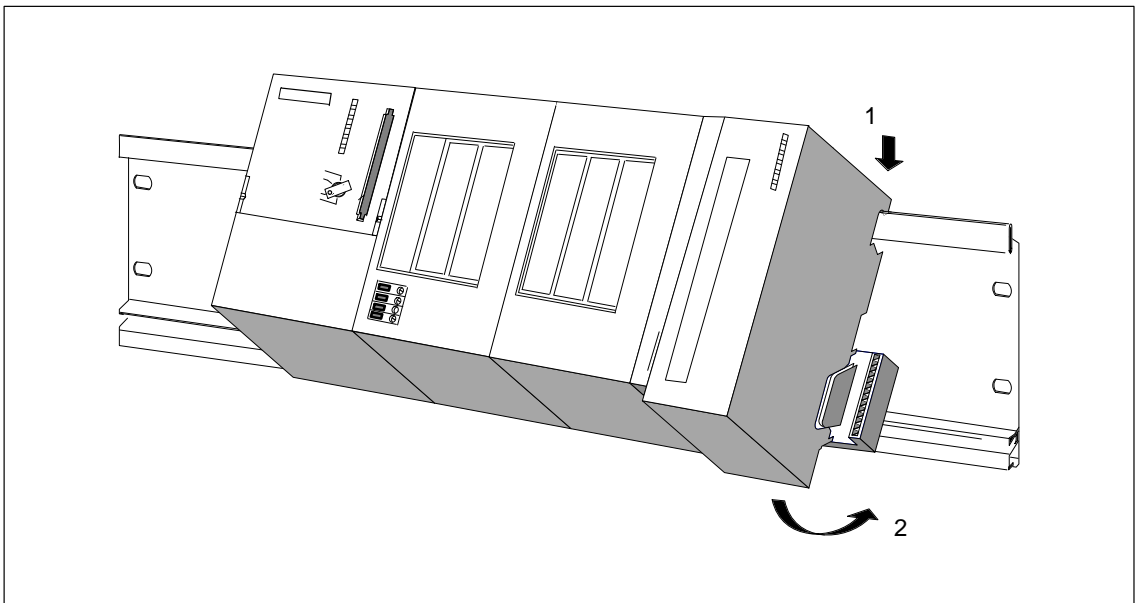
Fitting a Module Assembly Comprising FM Module and Expansion Modules onto the DIN Rail and Swinging into Place
